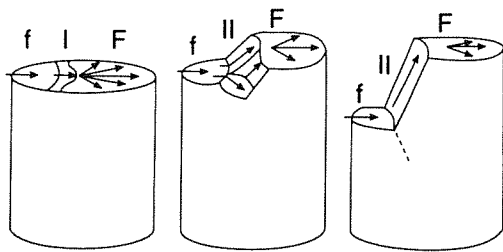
Evolution with cold drawing of fracture surfaces in HAC, from slightly to heavily drawn steels (left to right). Increasingly anisotropic behaviour with cold drawing (f: fatigue; I: mode I propagation; II: mixed mode propagation; F: final fracture by cleavage).
